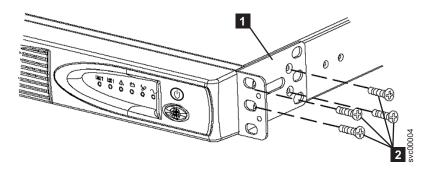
Installing the support rails for a 2145-1U uninterruptible power supply into the rack
